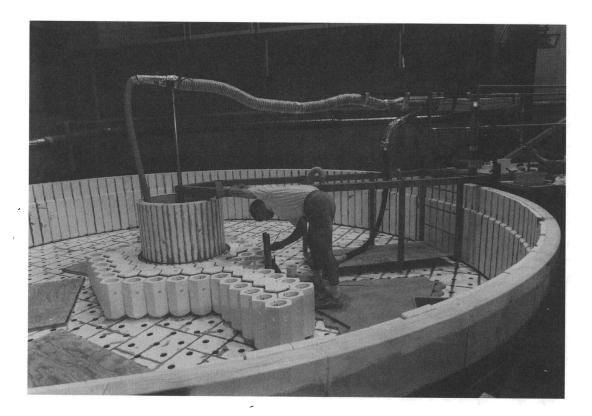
This photo shows R. Lutz installing one of many hexagonal core boxes in the 6.5 meter mold. Each of these boxes will form a void in the finished honeycomb. Silicon carbide bolts hold the box against buoyancy forces. The boxes or cores are also pinned to each other to keep them aligned vertically. A special fixture aligns each box with respect to holes in the grid of hexagonal tiles on the floor of the mold. After the bolt has been tightened and the cross-link pins installed, a ceramic fiber cap is glued on each core box. The cantilevered bridge provides human and utility access to the mold. Some of the Inconel steel containment bands may be seen in the right foreground. UA photo by Lori Stiles
